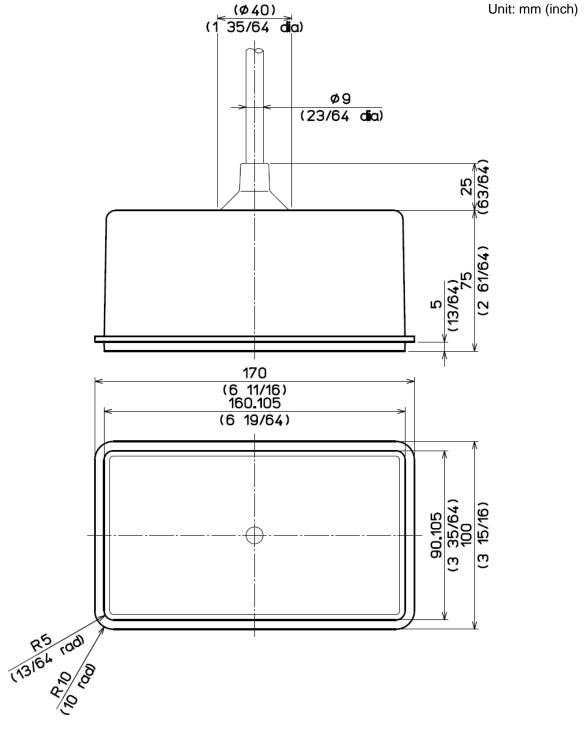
Outline dimensions of a transducer (TD340-K)
